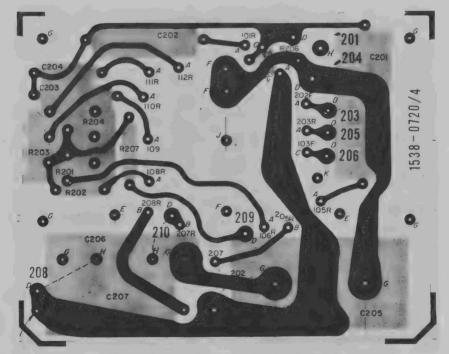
Switch-circuit etched-board assembly. (Complete assembly is P/N 1538-2721.)
